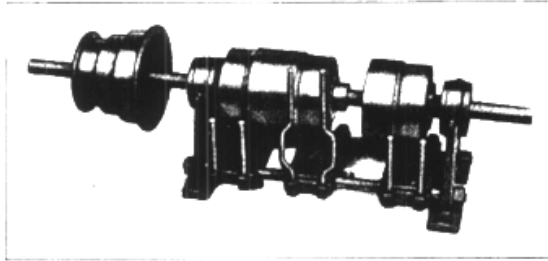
Wall or Ceiling Countershaft, ball-bearing
